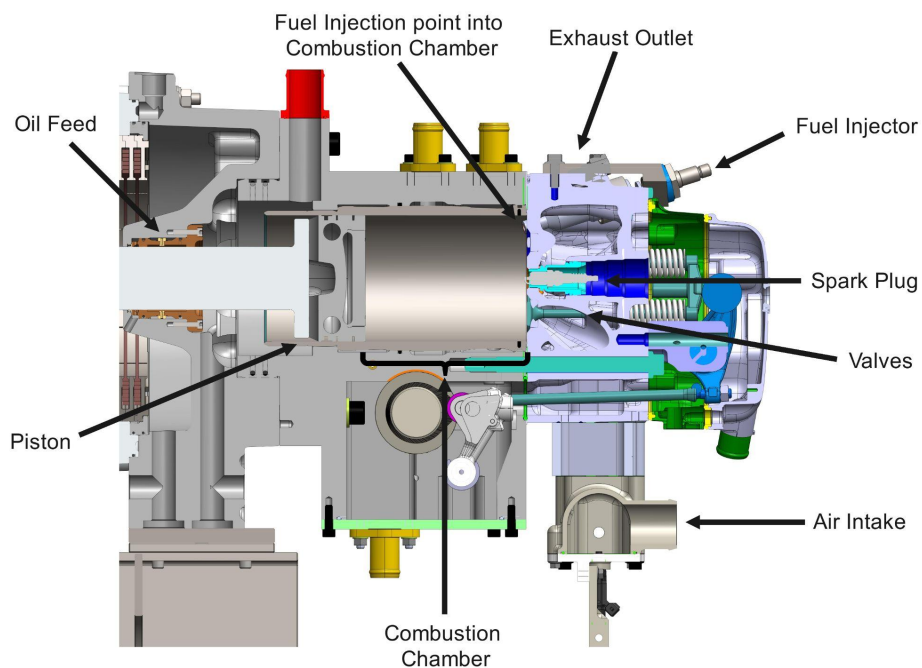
Sectional View of Cylinder Head and Combustion Chamber (located at each end of the test rig) with labels of each component.
